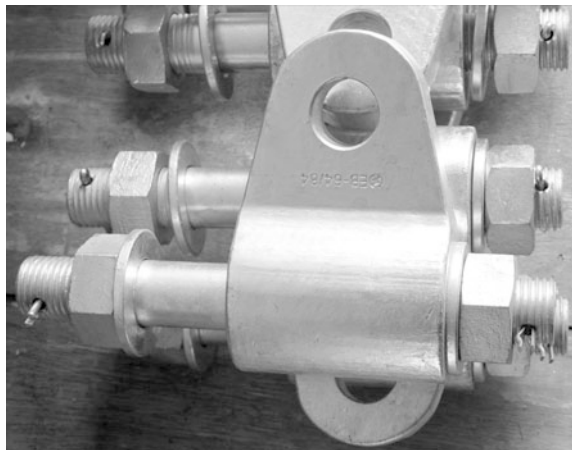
Tension string tower-connecting fittings-GD clevis
